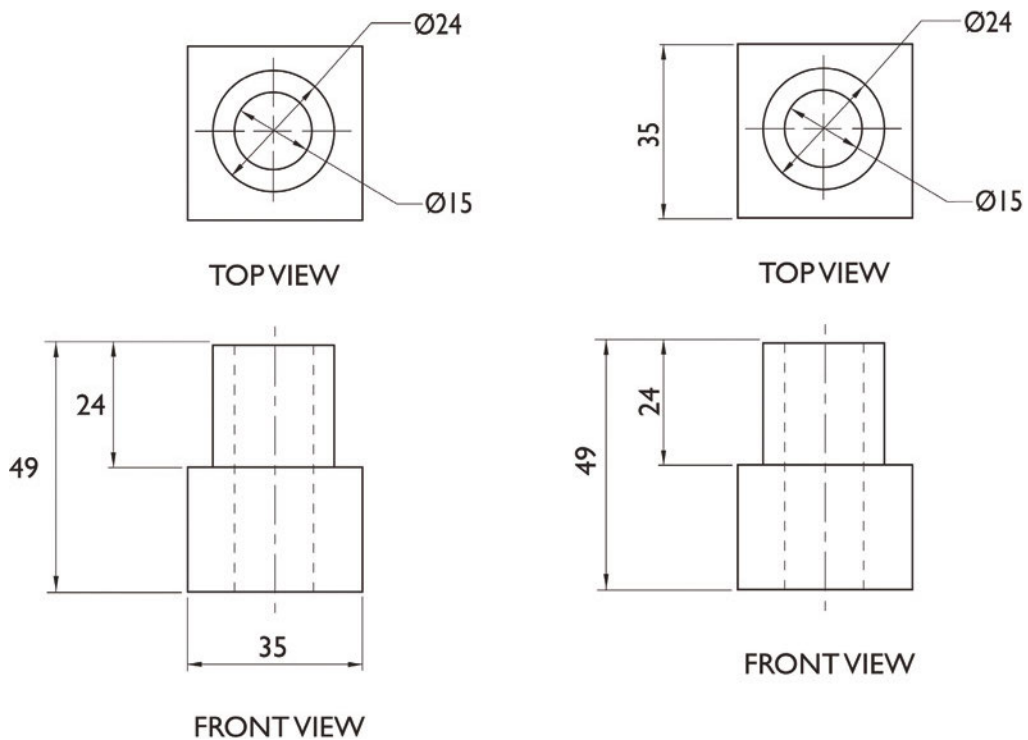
Third-angle orthogonal drawing with dimensions. You can dimension your views in different ways; you need to ensure you have dimensioned all details, while ensuring your dimensioning is clear and easy to read.
